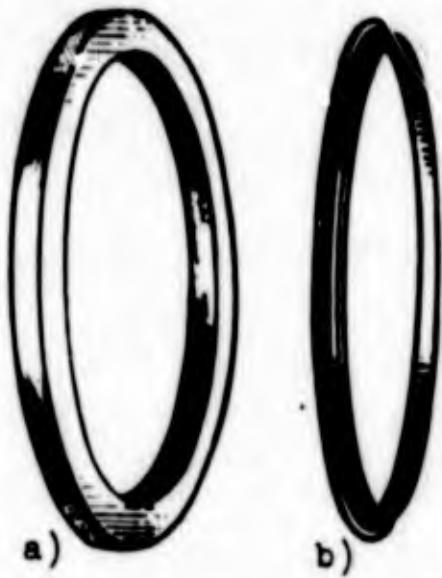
Blanks. a) cast centrifugally; b) bent from profiled bar with butt welding.
